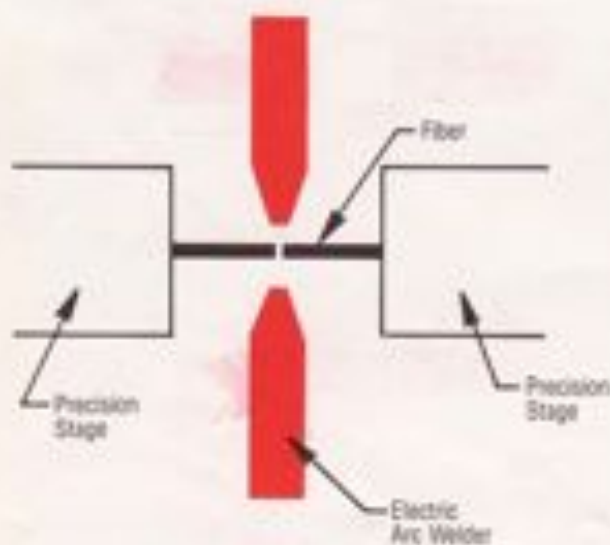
Fiber splices by thermal fusion. Fusion welder using electric arc. Microtorch may also be used.
